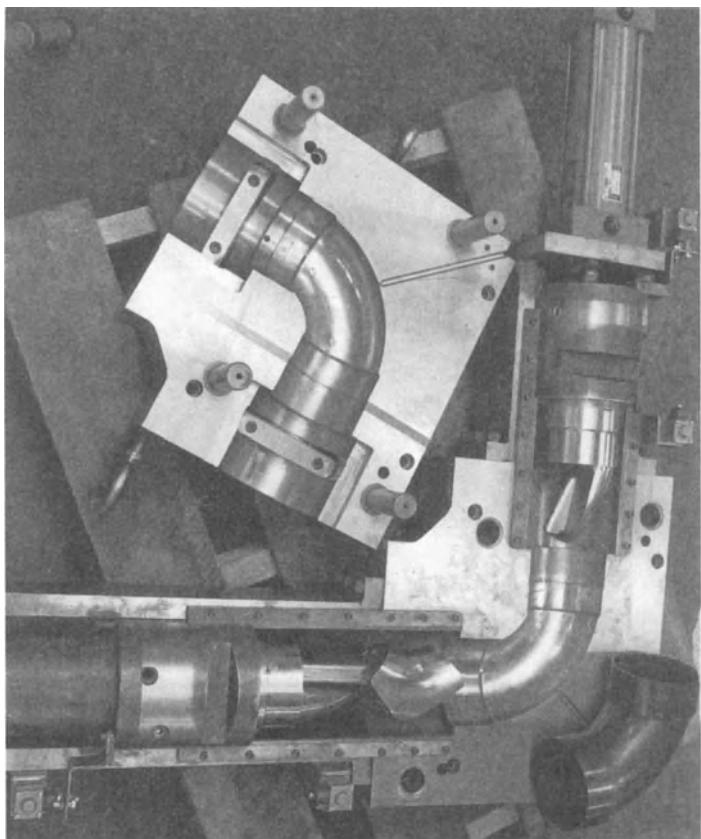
Cavity blocks for pipe elbow are made of prehardened stainless steel; molded elbow is seen in lower right corner.
